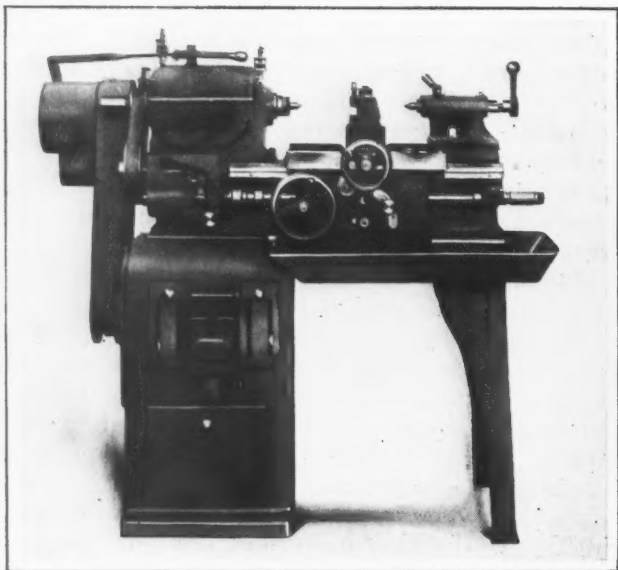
Sebastian Manufacturing Lathe Available with One or Two Spindle Speeds
